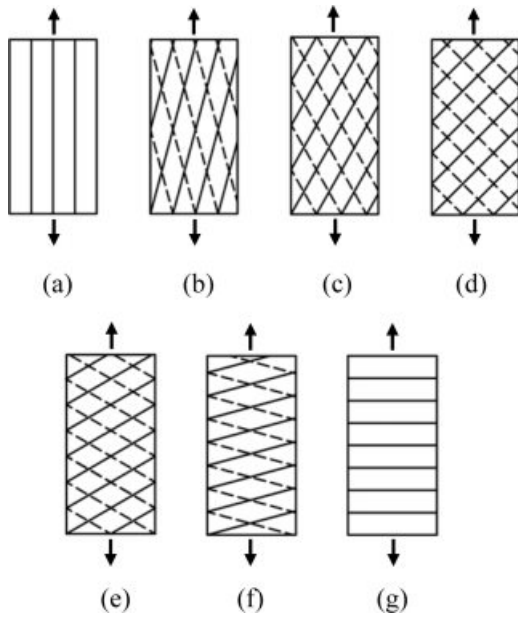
Schematic drawings of layered specimens for symmetric tool paths: (a) 0/0; (b) 15/-15; (c) 30/-30; (d) 45/-45; (e) 60/-60; (f) 75/-75; (g) 90/-90.
